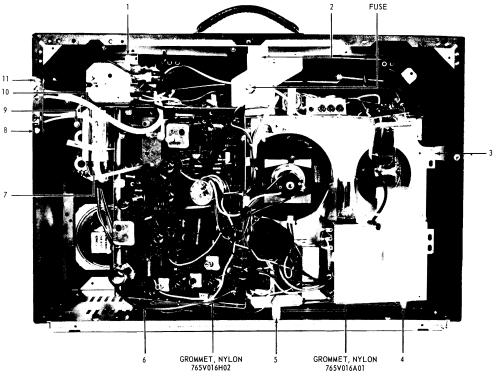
Rear view of 19" chassis, showing location of screws for chassis removal.
